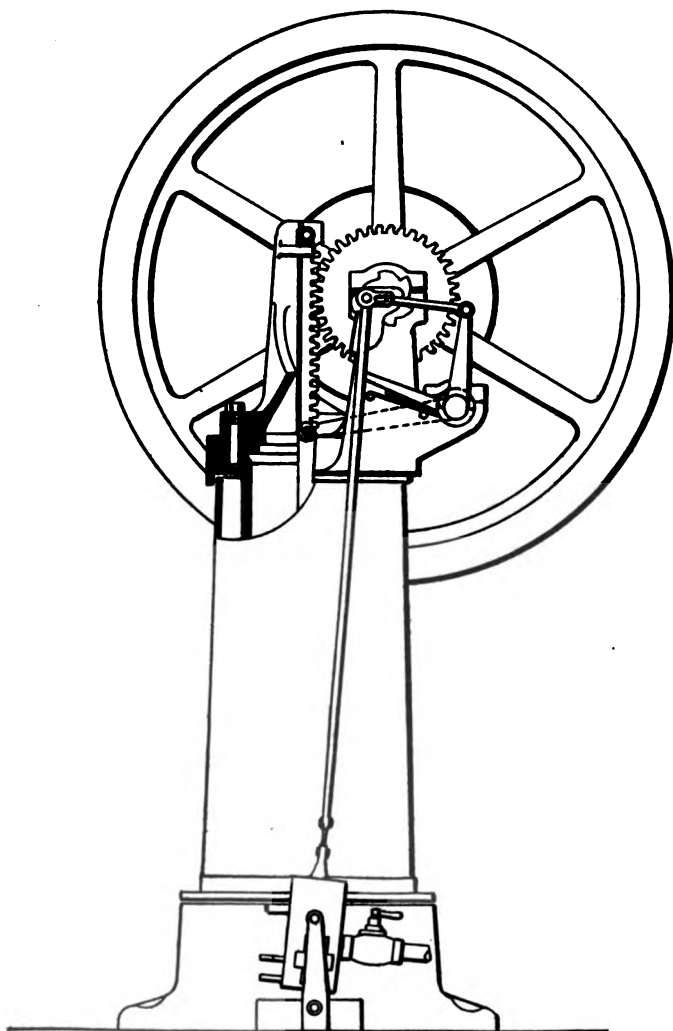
OTTO-LANGEN ATMOSPHERIC ENGINE (1862)
